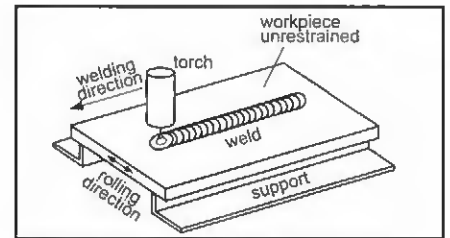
Welding with workpiece unrestrained to avoid interfering with interaction between the weld metal and partially melted zone during welding.
